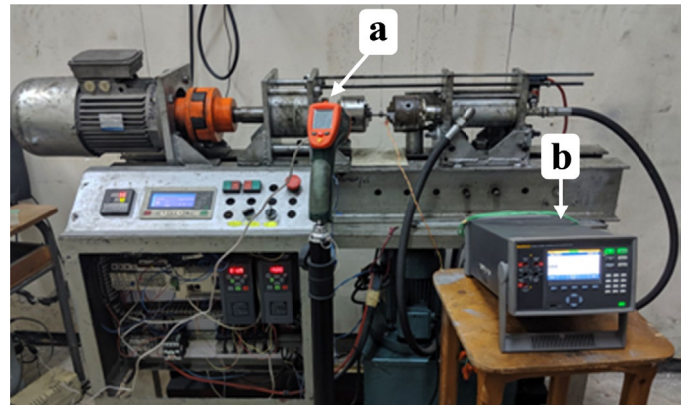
Friction welding machine, (a) infrared thermometer, (b) thermometer by touch
